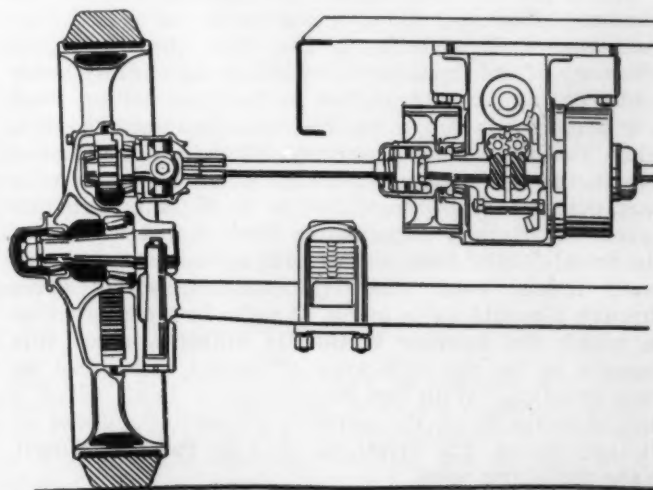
FRONT AXLE OF WALTER FOUR-WHEEL-DRIVE TRUCK
